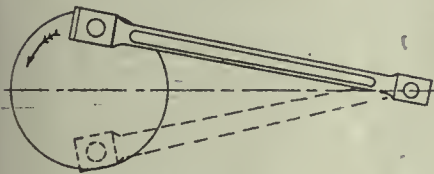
CONNECTING ROD FOR STEAM ENGINE.
